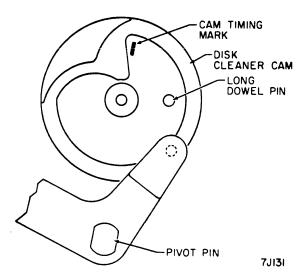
Cam Position For Removing Brush Motor Assembly
